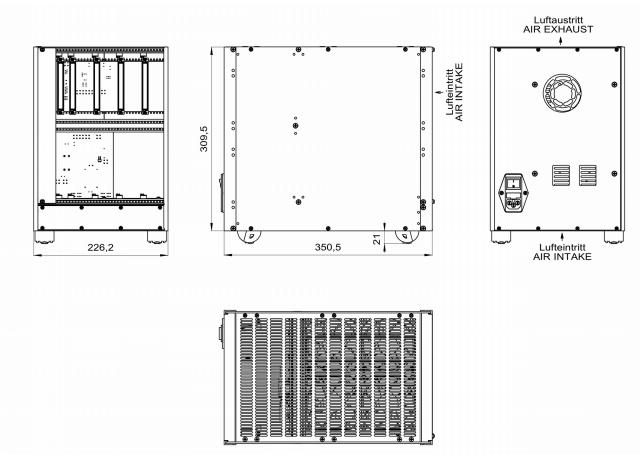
Dimensional drawing ECH 244 – 4 channel MMS HV crate
